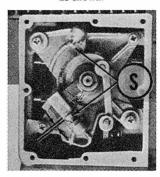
Gear change stop bolts (S) should have approximately 1 MM clearance when stop ball engages detent in shifter cam.
